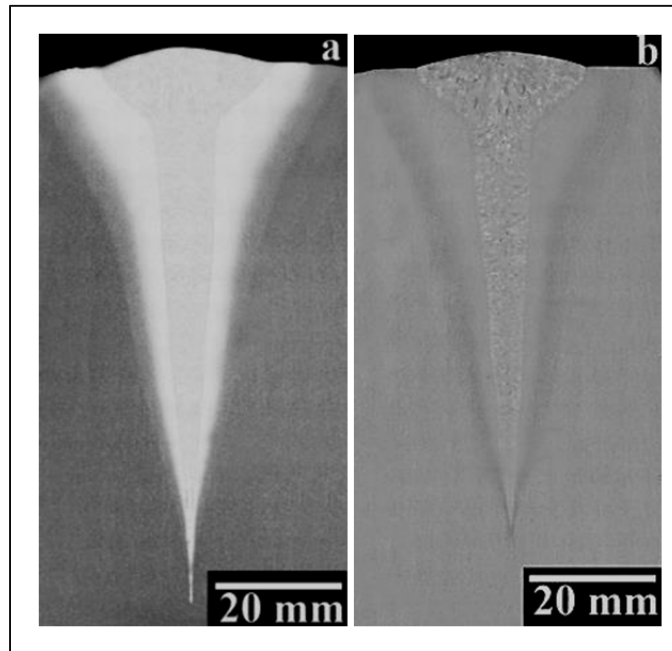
OM images of the macrostructure showing the entire transverse cross section of EB welded UNS S41500 in: (a) as-welded and (b) PWHTed conditions
